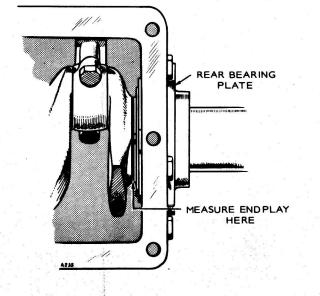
MEASURING CRANKSHAFT ENDPLAY
